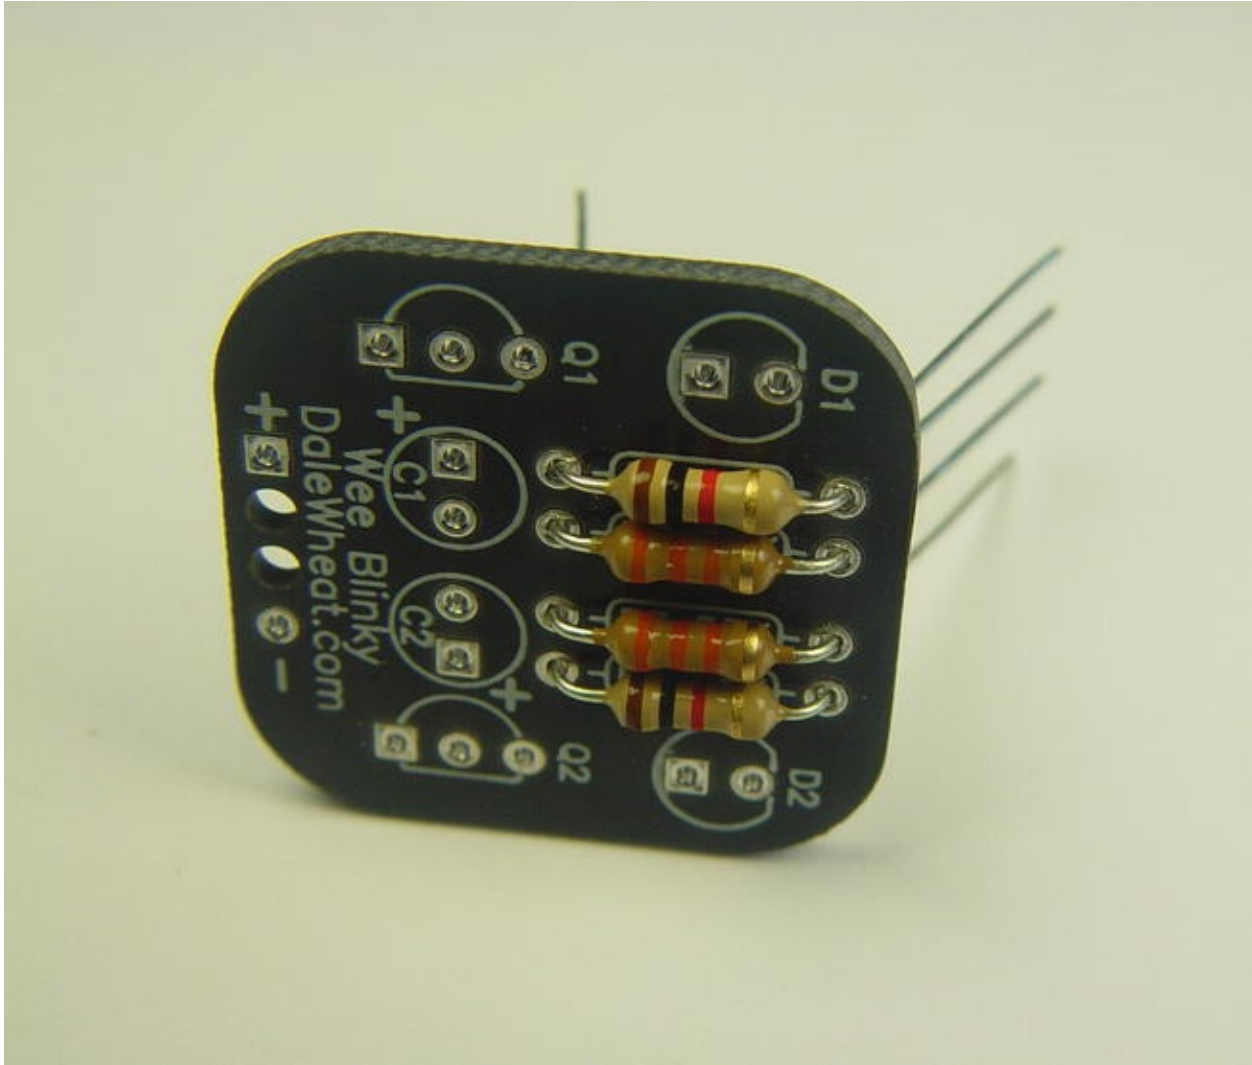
Resistor leads are bent at right angles and inserted into holes in the PCB to be soldered.
